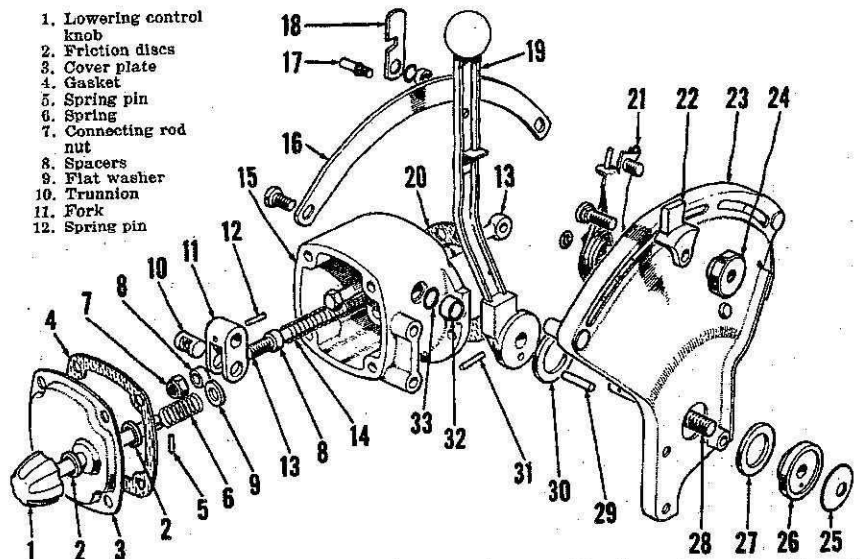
Exploded view of control lever housing assembly. Note that connecting rod (13) is also shown in exploded view of control mechanism (rockshaft right hand support bracket) housing. Refer also to assembly drawing in Fig. 206.
